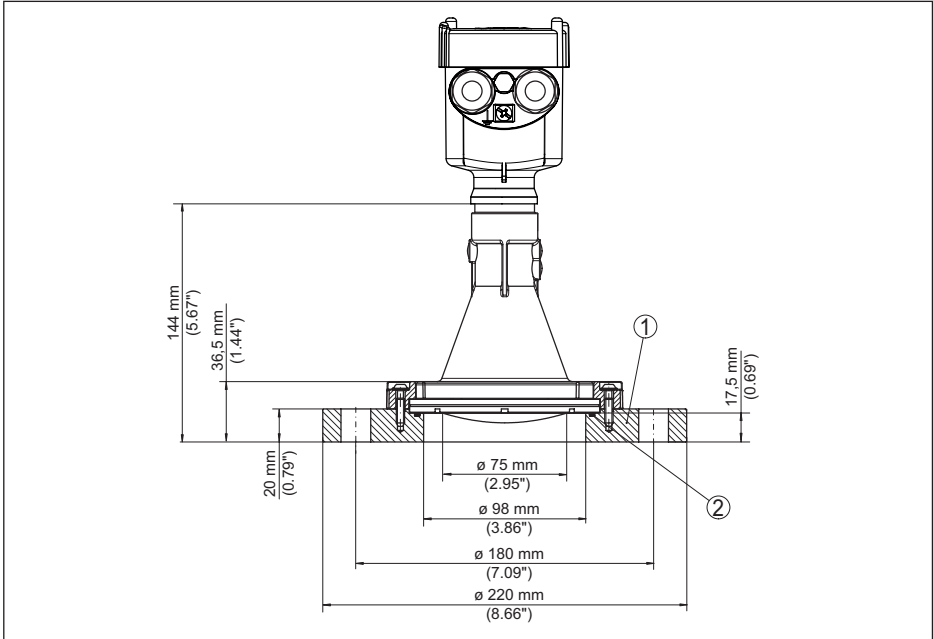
Radar sensor with adapter flange DN 100 PN 6
